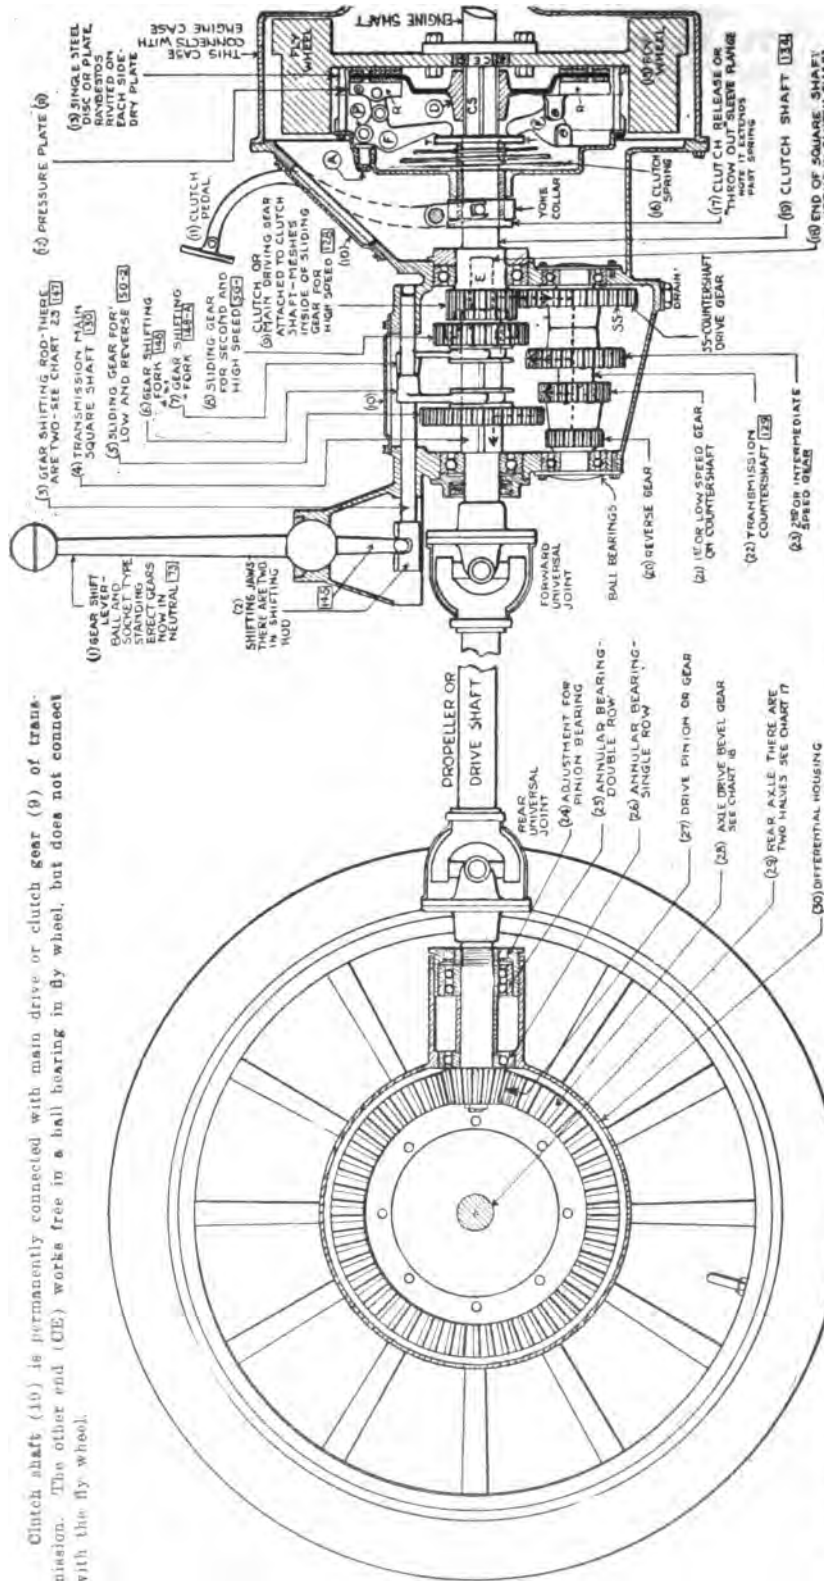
Ball and socket type of gear shift lever (73) is now standing upright in center of the socket and is in "neutral" position.
